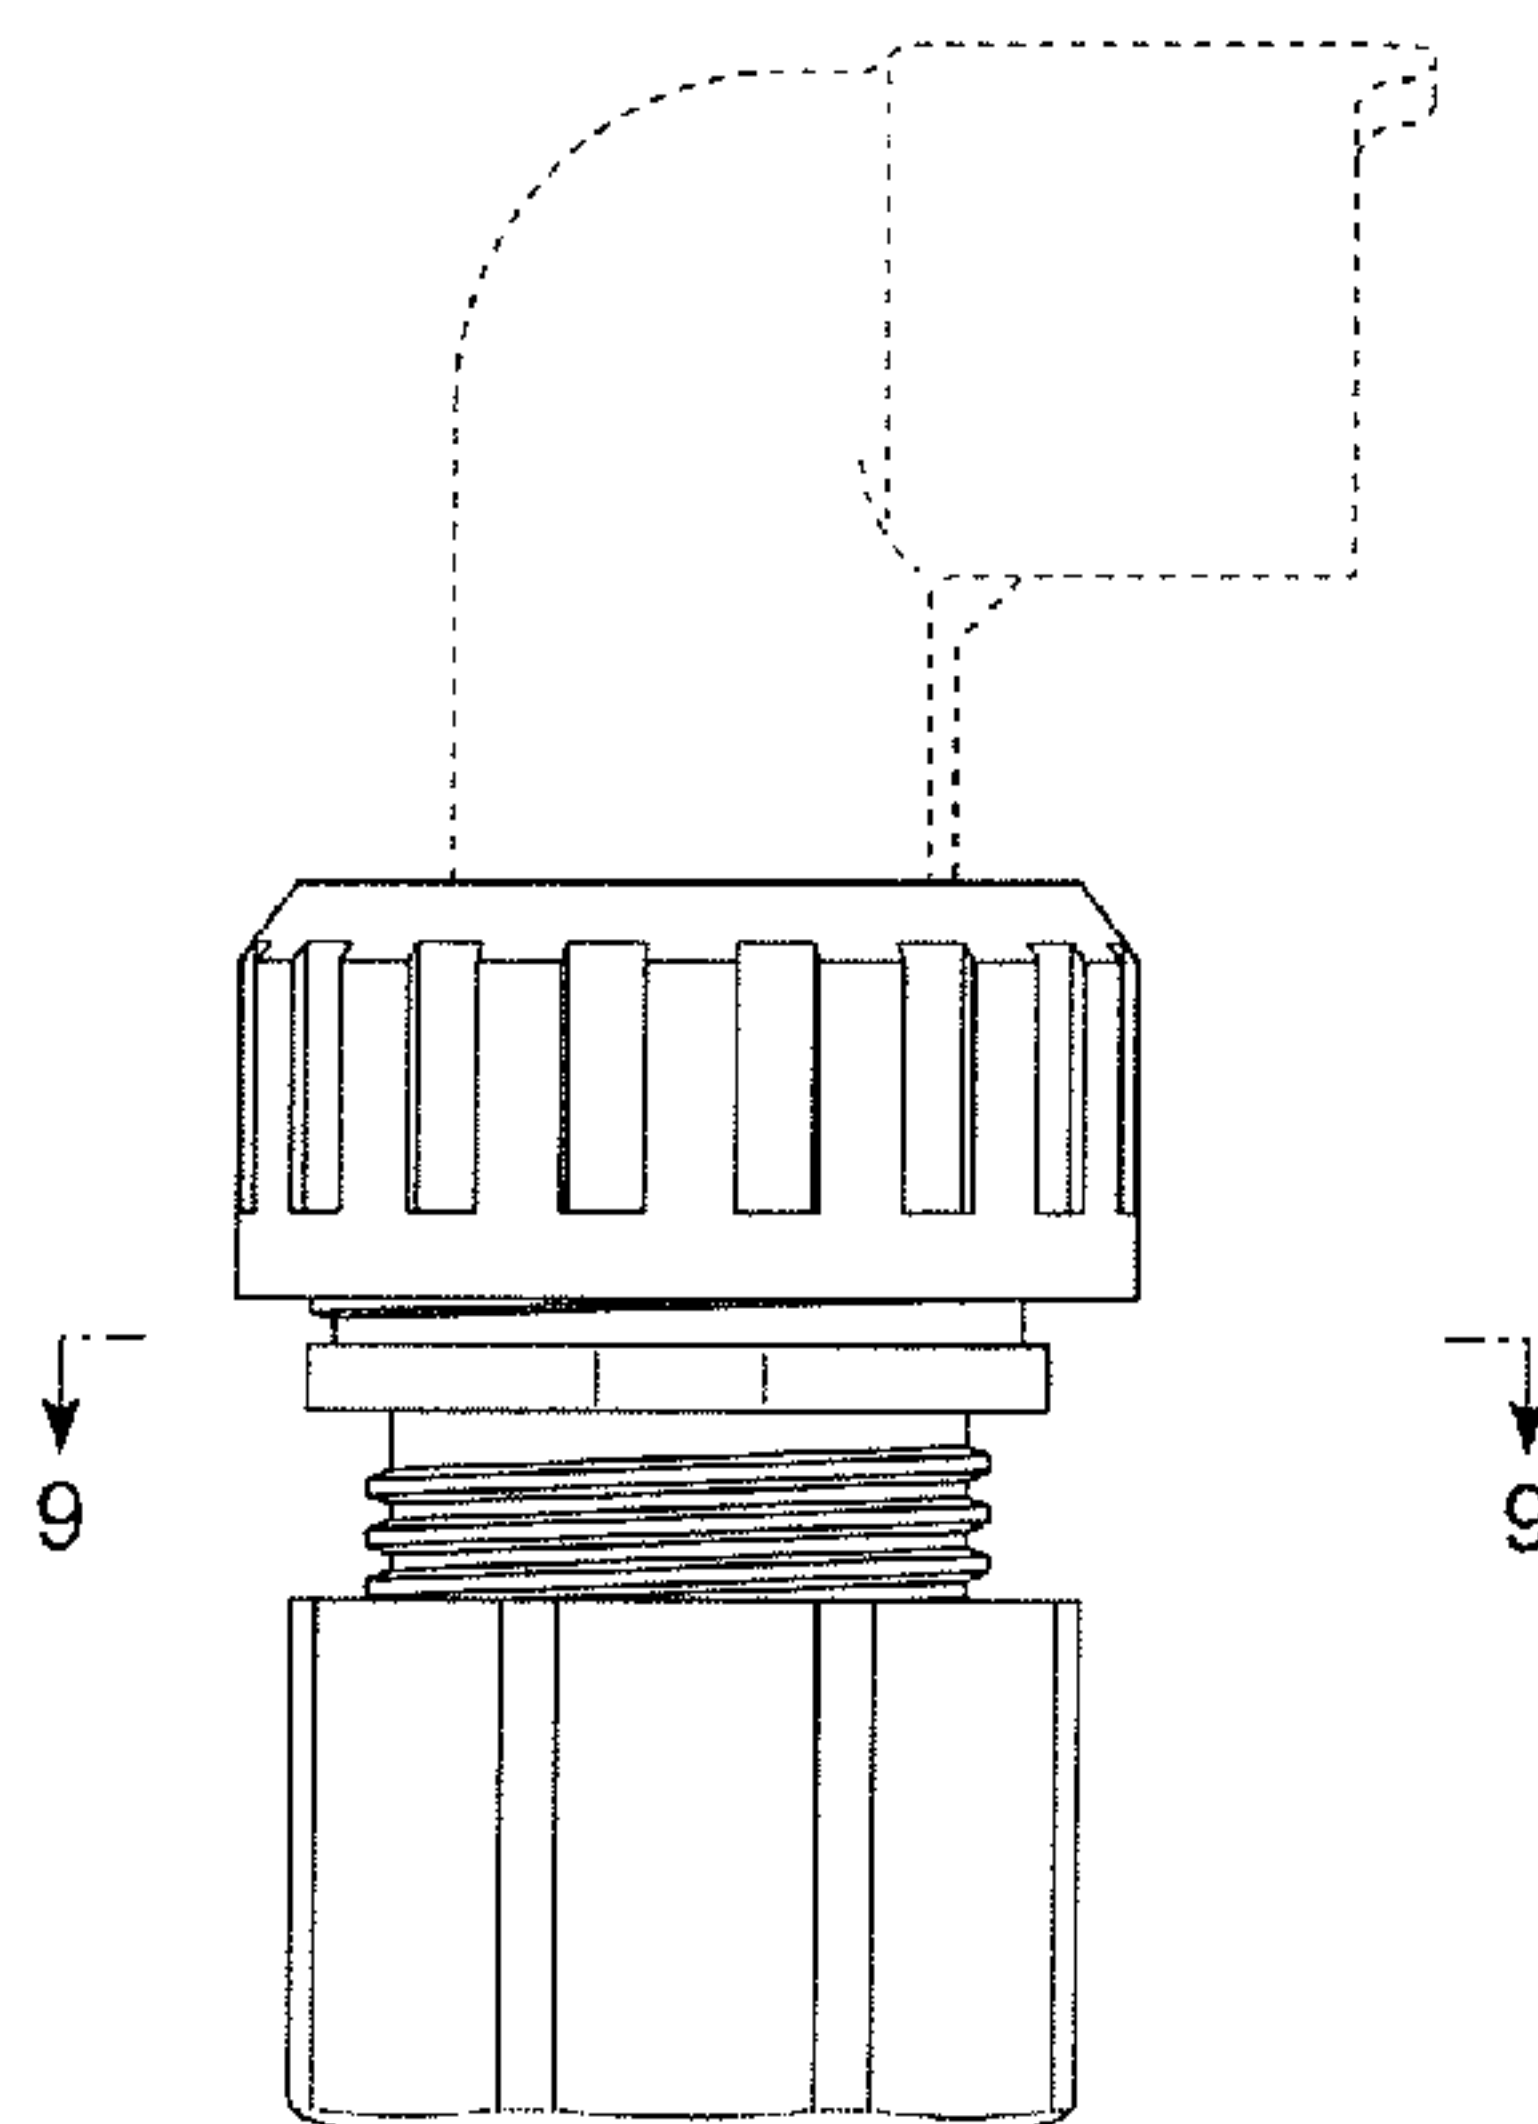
is a perspective view showing the pipe fitting for a filter of my new design in a first condition of use;
